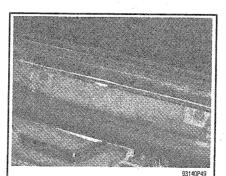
Removal of the armrest panel and the door handle cup will allow access to the two hidden mounting screws
